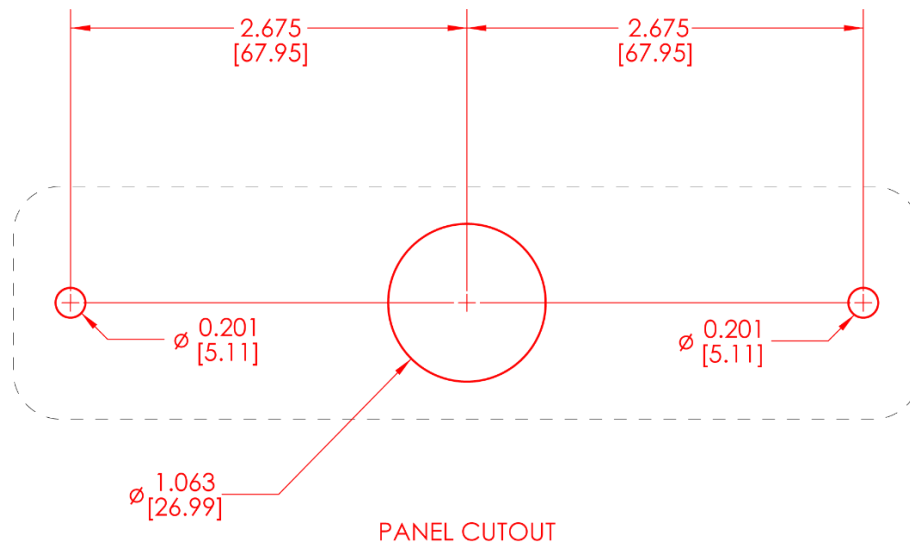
SmartTOUCH, 5 position installation dimensions in inches [millimeters].
